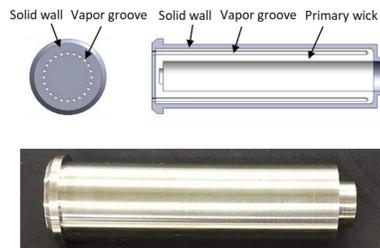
(above) CAD renderings with the front face and sectional view of the 3D printed evaporator; (below) A photo of the actual evaporator taken prior to installation
